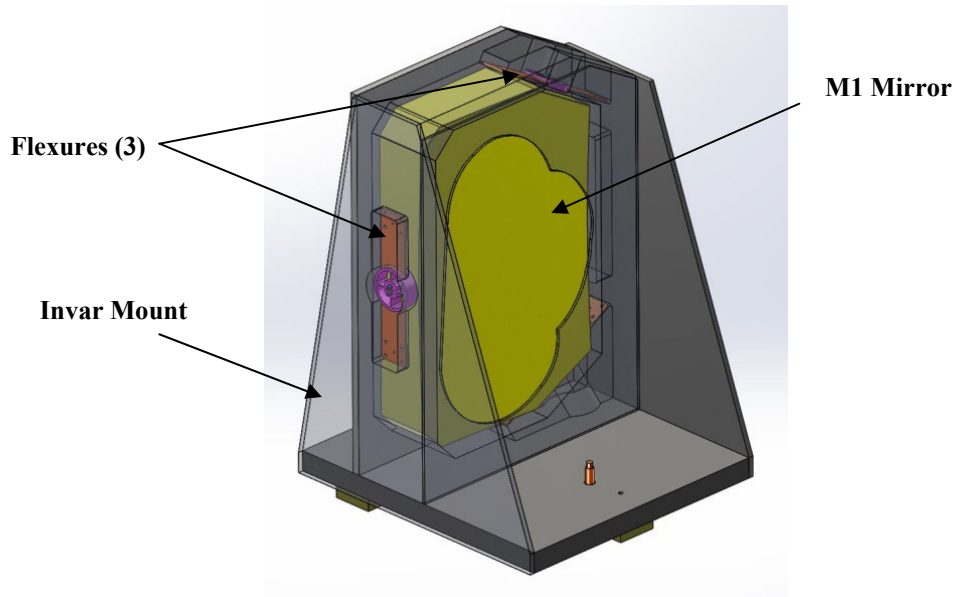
Typical Mirror Mount – Bonded Flexure Design in Invar Bezel
